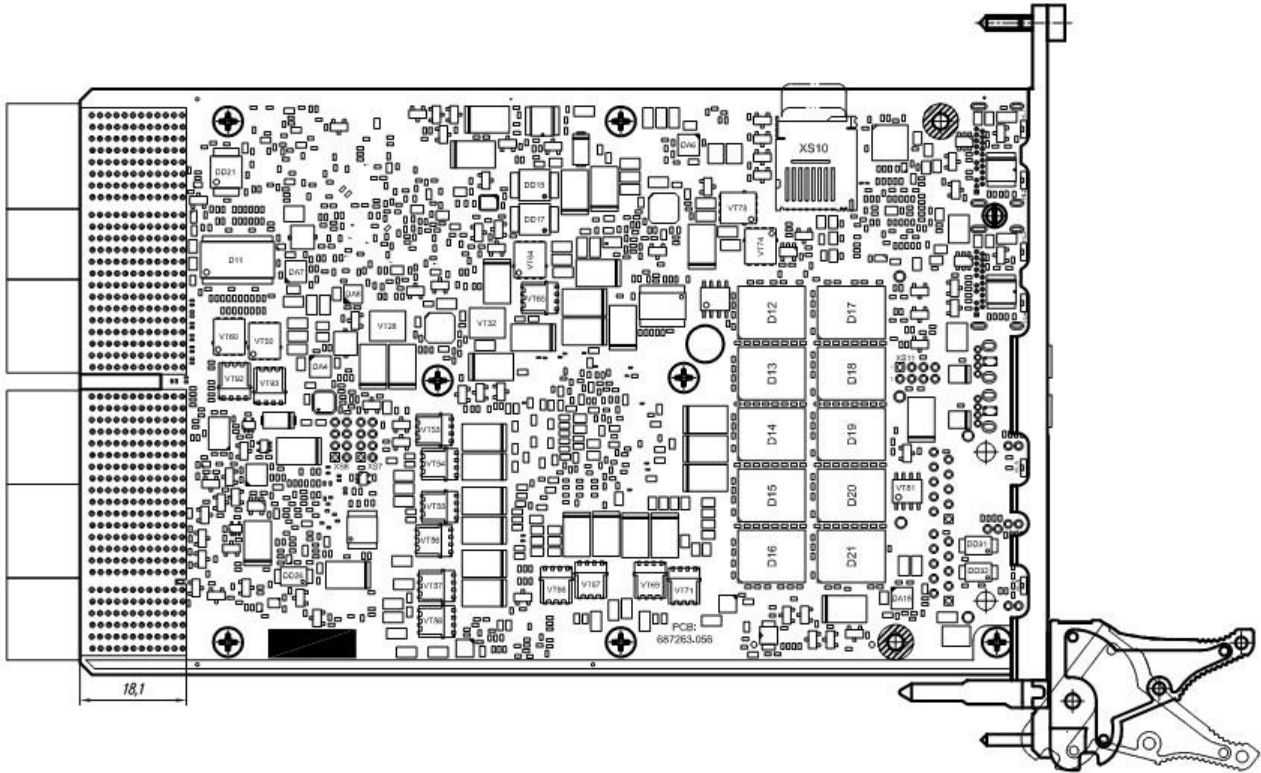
Location of main components of CPC512 (Bottom view)
